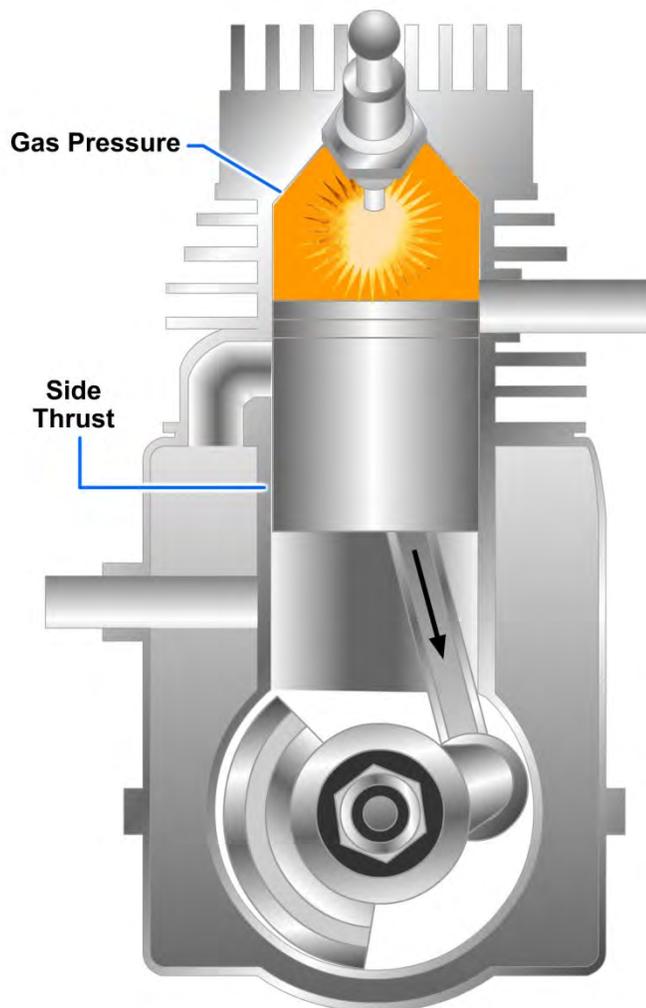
Trunk-type piston in a single-acting engine showing side thrust.
